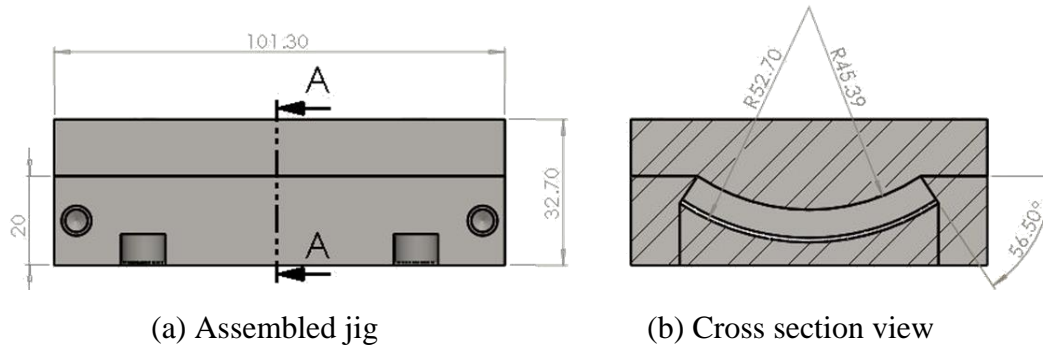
Schematic views of a metal jig for forming metal mesh pads. Dimensions in mm.
